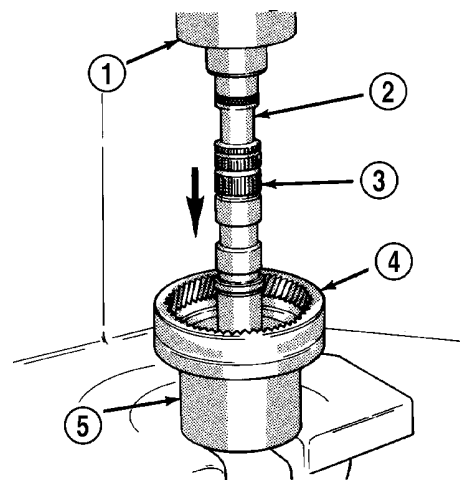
Install Output Shaft into Rear Planetary Annulus Gear
